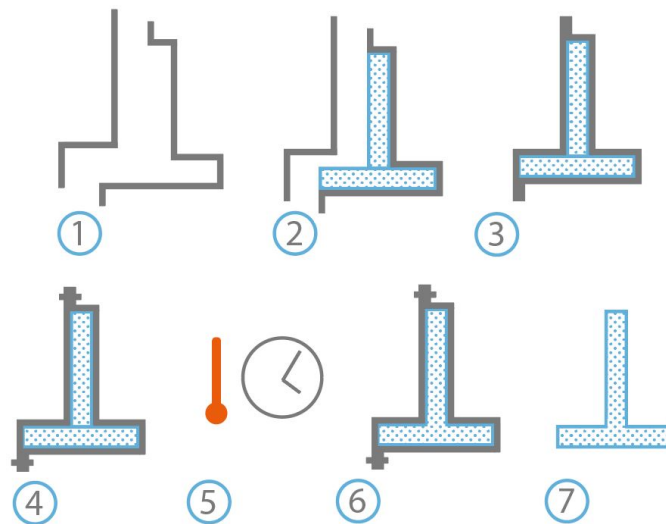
Fusion process using a steel mould: (1) two steel mould segments, (2) insertion of glass elements, (3) closing mould, (4) securing mould with bolts, (5) fusion, (6) product in mould and (7) final fused product.
